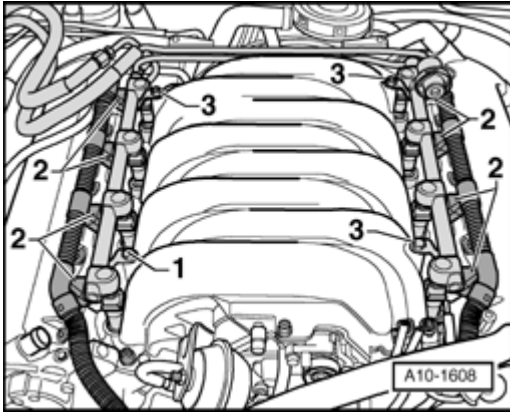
Identifying Hose, Fuel Injectors Connectors & Fuel Distributor
